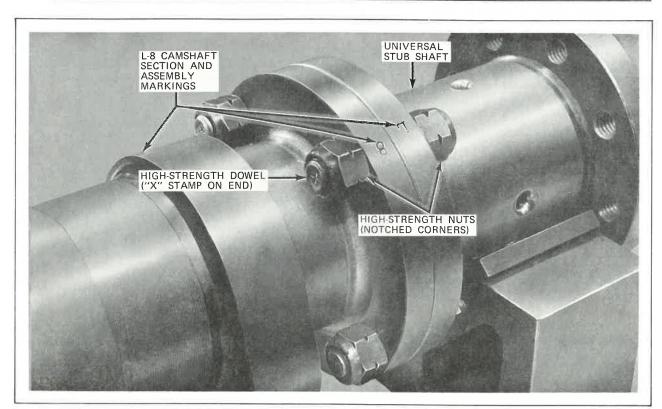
CAMSHAFT ASSEMBLY WITH NEW STYLE HIGHER STRENGTH DOWELS AND NUTS.
